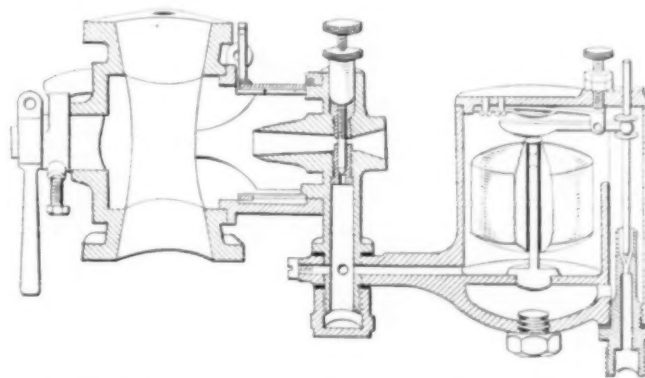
SECTION IN PERSPECTIVE OF THE COX CARBURETOR
